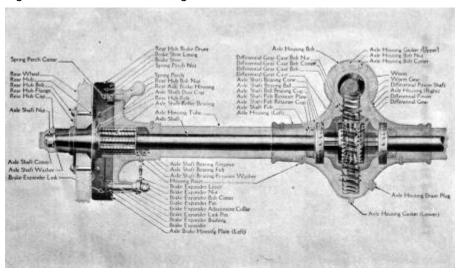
Truck Rear Axle: Cross Section Showing Worm and Worm Gear
